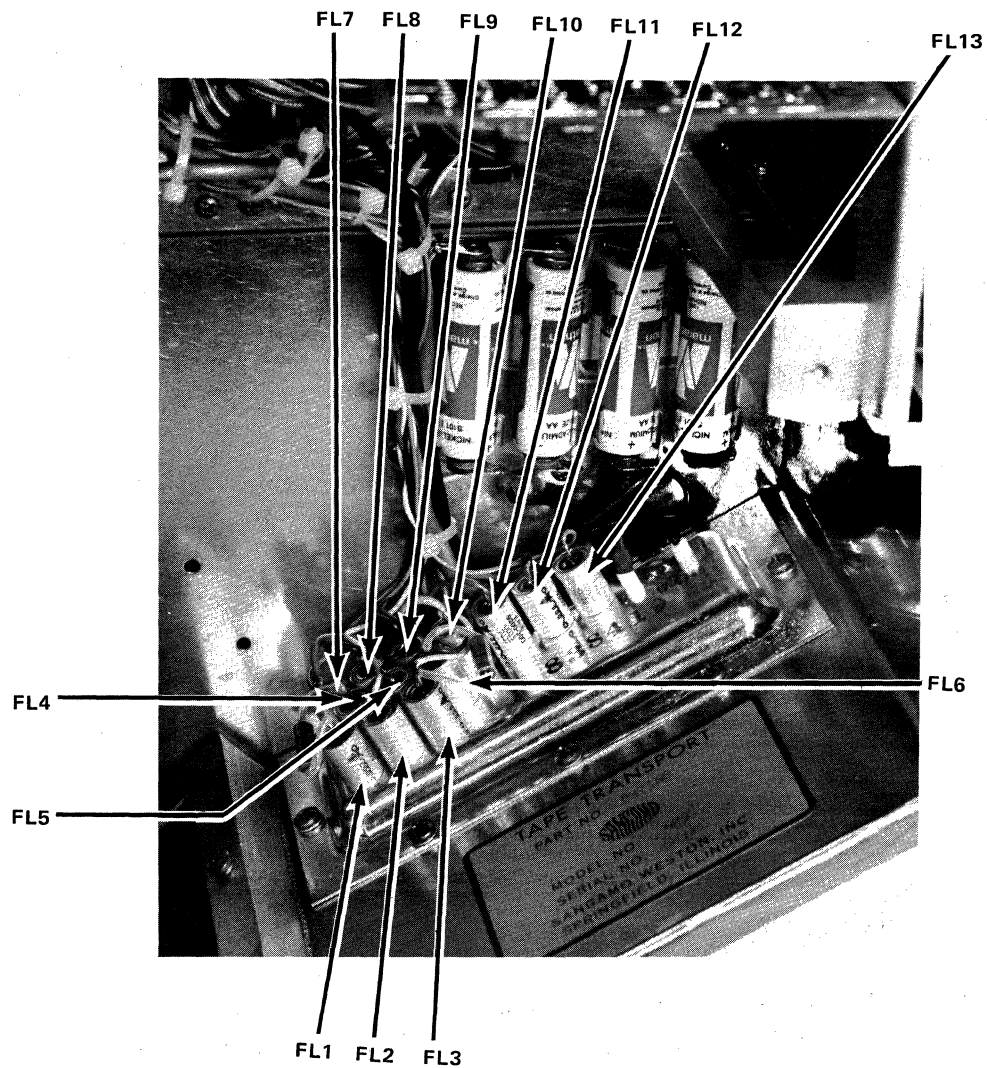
Power Supply Enclosure, Showing Feed-Thru Capacitors and Terminal Boards
